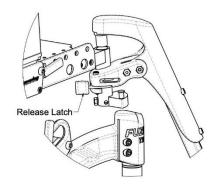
Swing-Away Front Rigging Latch Installation and Removal rigging
